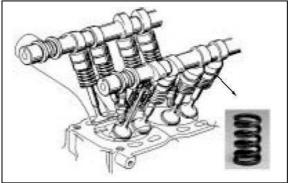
Arrangement of valve springs in an automobile engine (SUDA, 2005)
